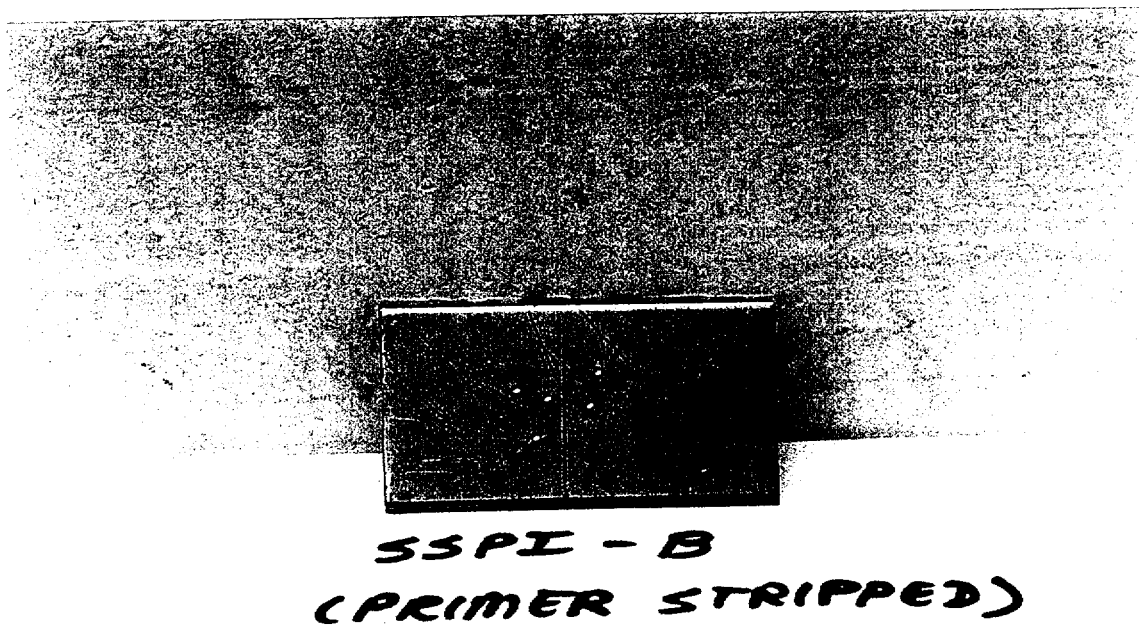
Stainless steel primer coated and inscribed (SSPI-B) shown after the coating was stripped in the post-test condition. (Bottom Side)
